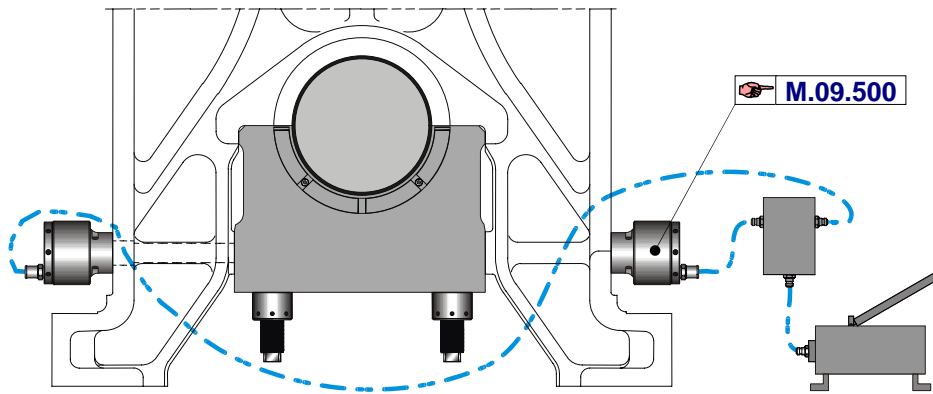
Install the hydraulic tightening tool (유압 체결 공구의 설치)
